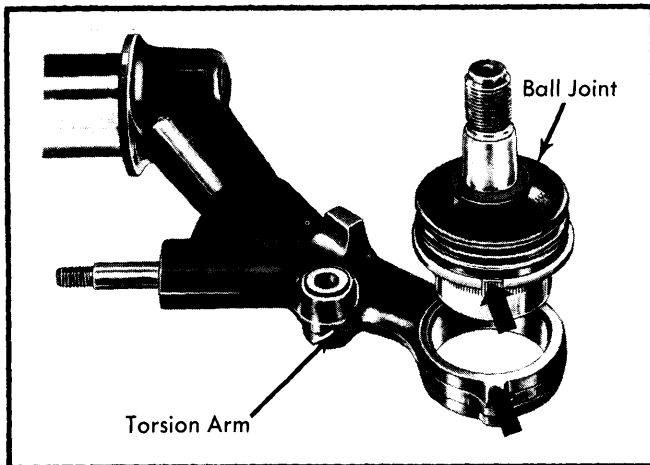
Align Notch in Ball Joint with Boss on Torsion Arm
